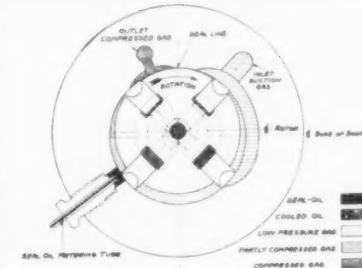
Section of a Majestic compressor, showing its 4 vanes
